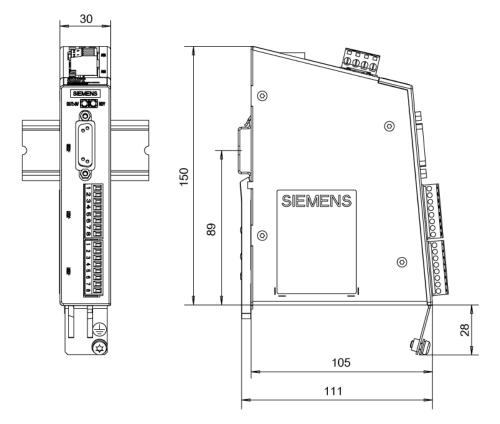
Dimension drawing of the SMC30 Sensor Module
